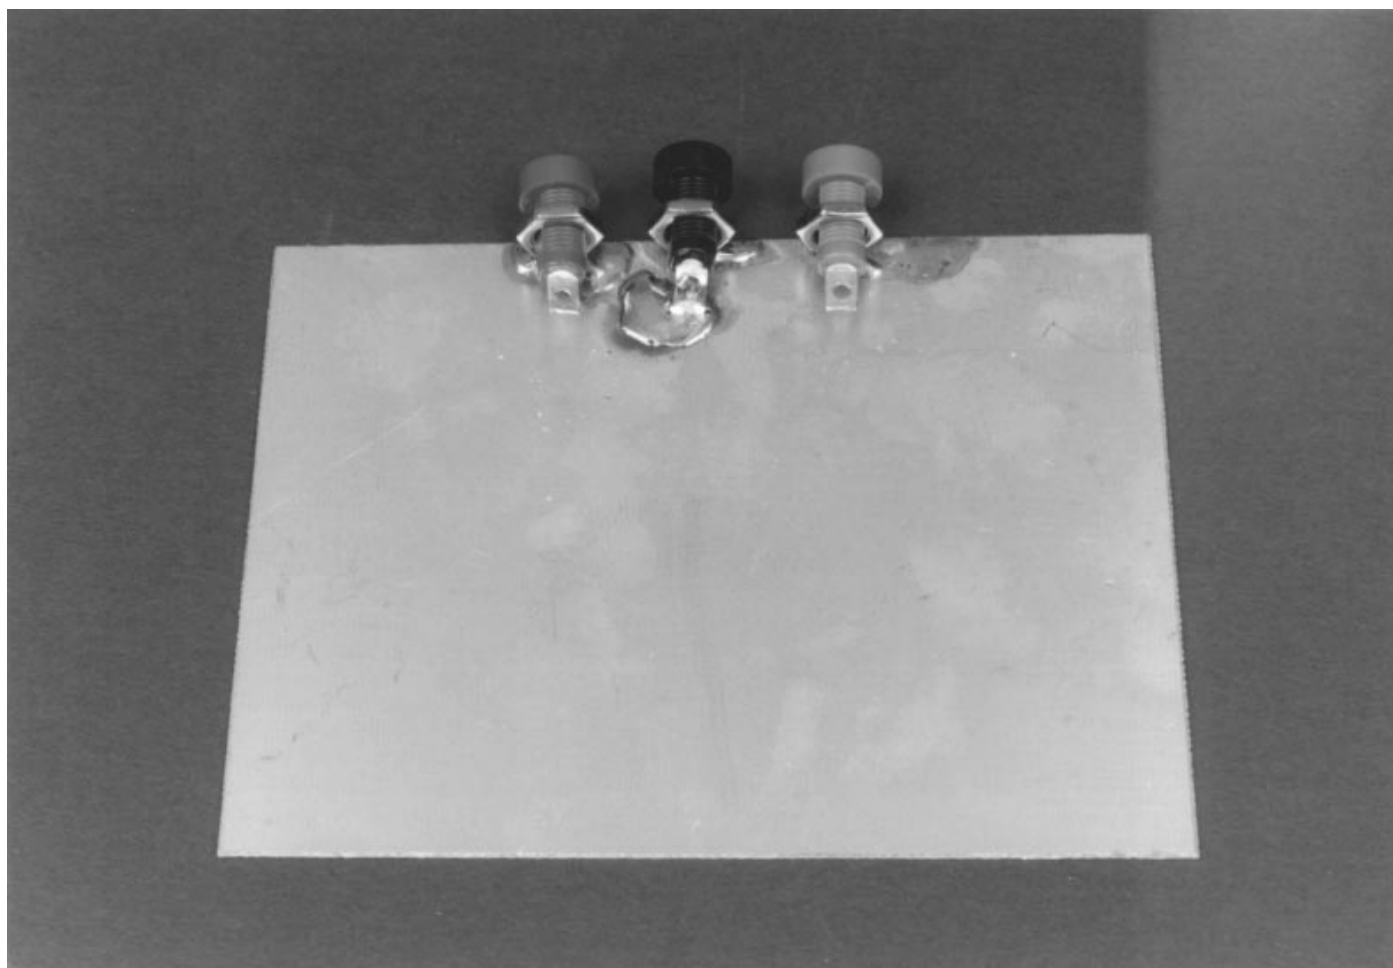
The Banana Jacks are Soldered to the Copper Clad Board
